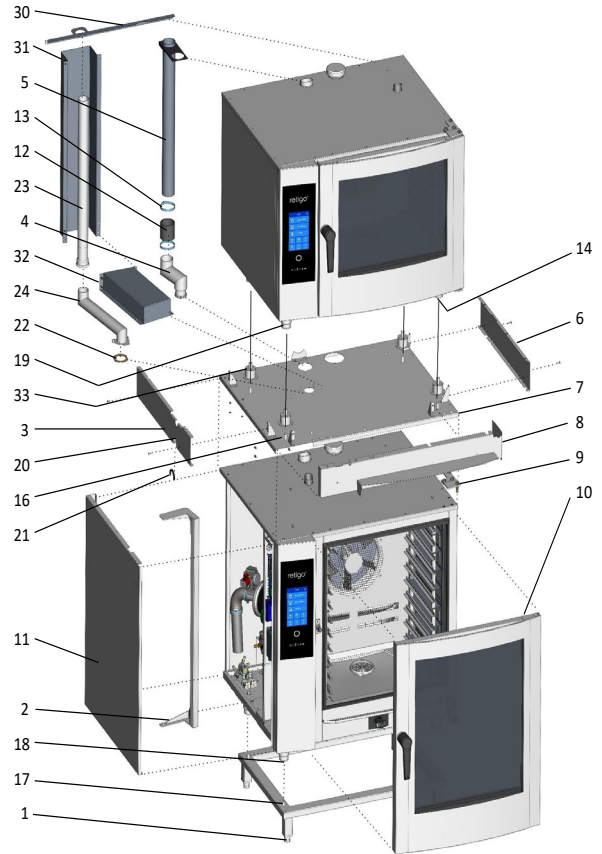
Assembly of two gas appliances 0611 and 1011
